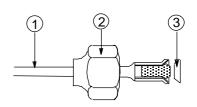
Style 50 (incl. valve depressor mounted into machined flare)
